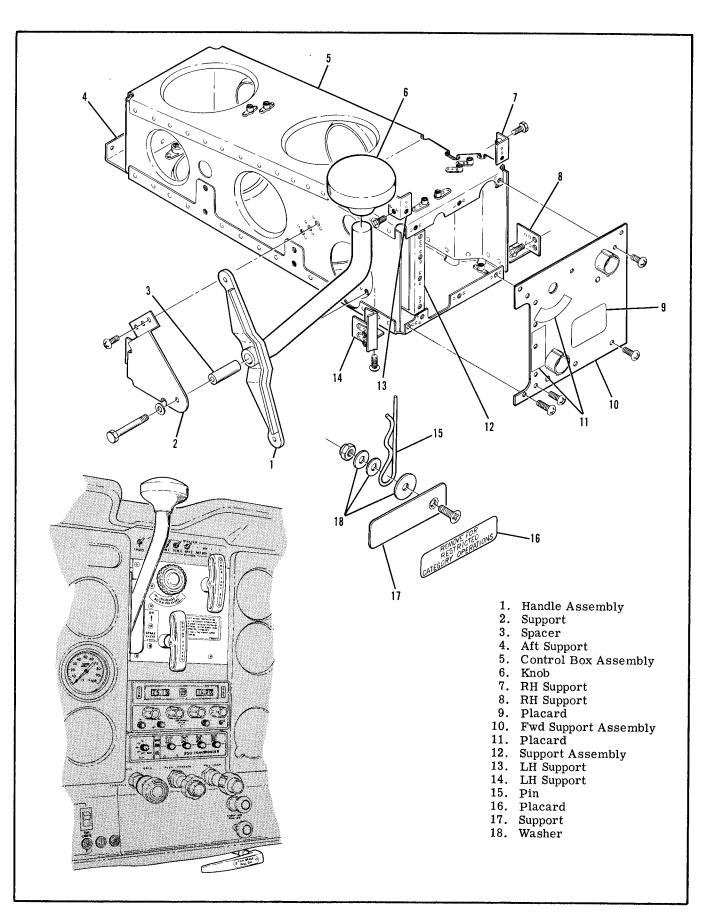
Control Box Installation (Sheet 2 of 2)
